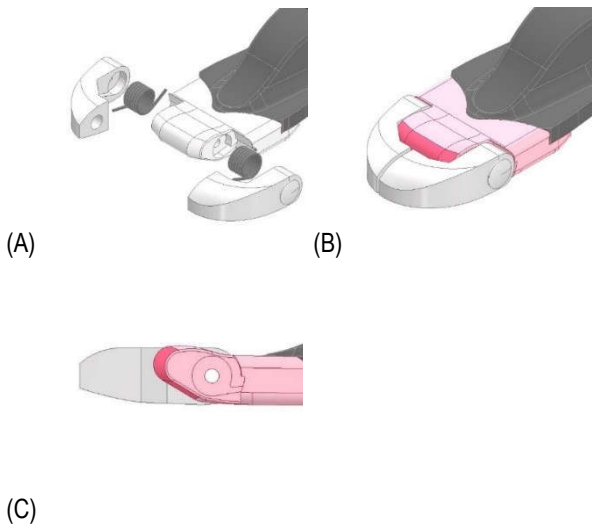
Forefoot design of a robotic prosthetic foot: (a) full assembly, (b) torsion spring exploded view, and (c) sagittal cross-sectional view of the metatarsal bone head slope
